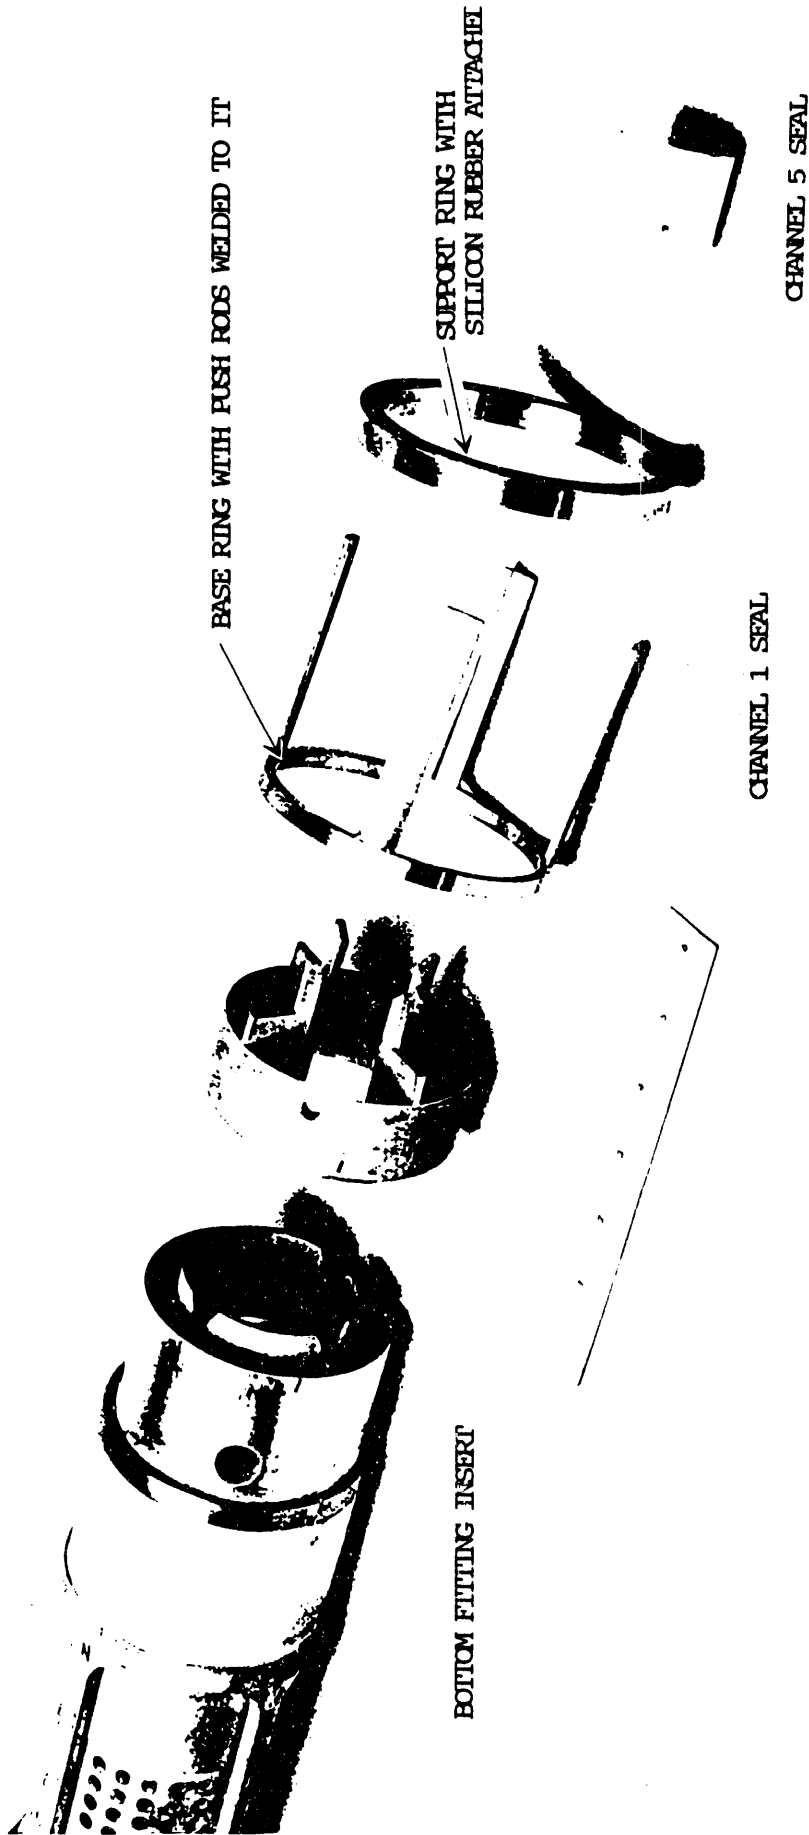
ASSEMBLY VIEW OF CHANNEL 1 & 5 LOWER SEAL.
